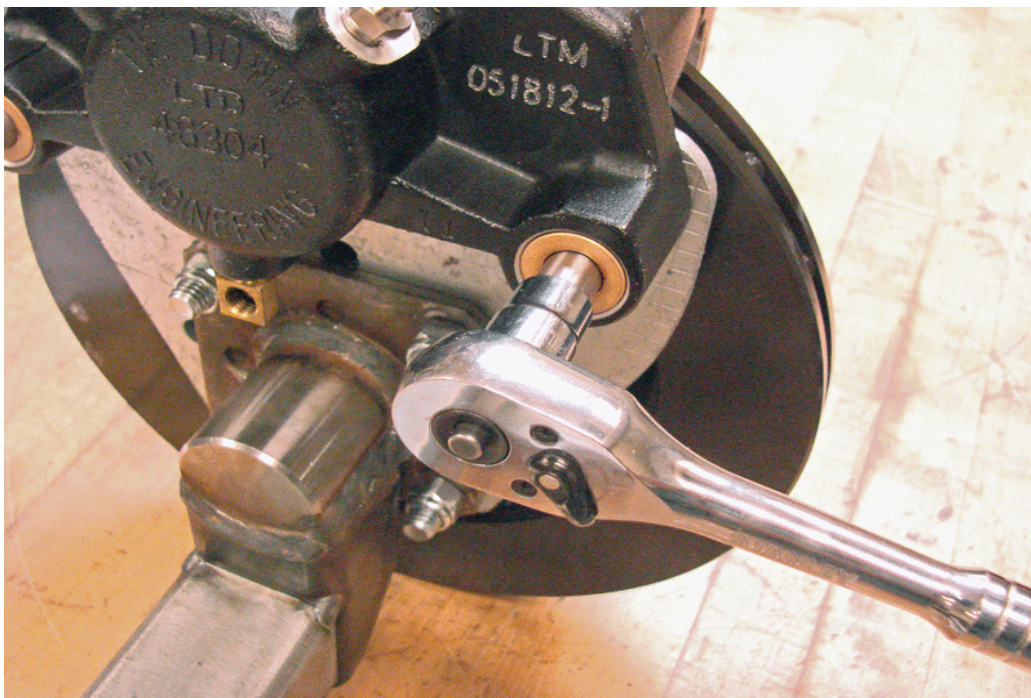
Using the 7/16" Socket & Ratchet, or Box End Wrench, Tighten Both Slider Pins.
